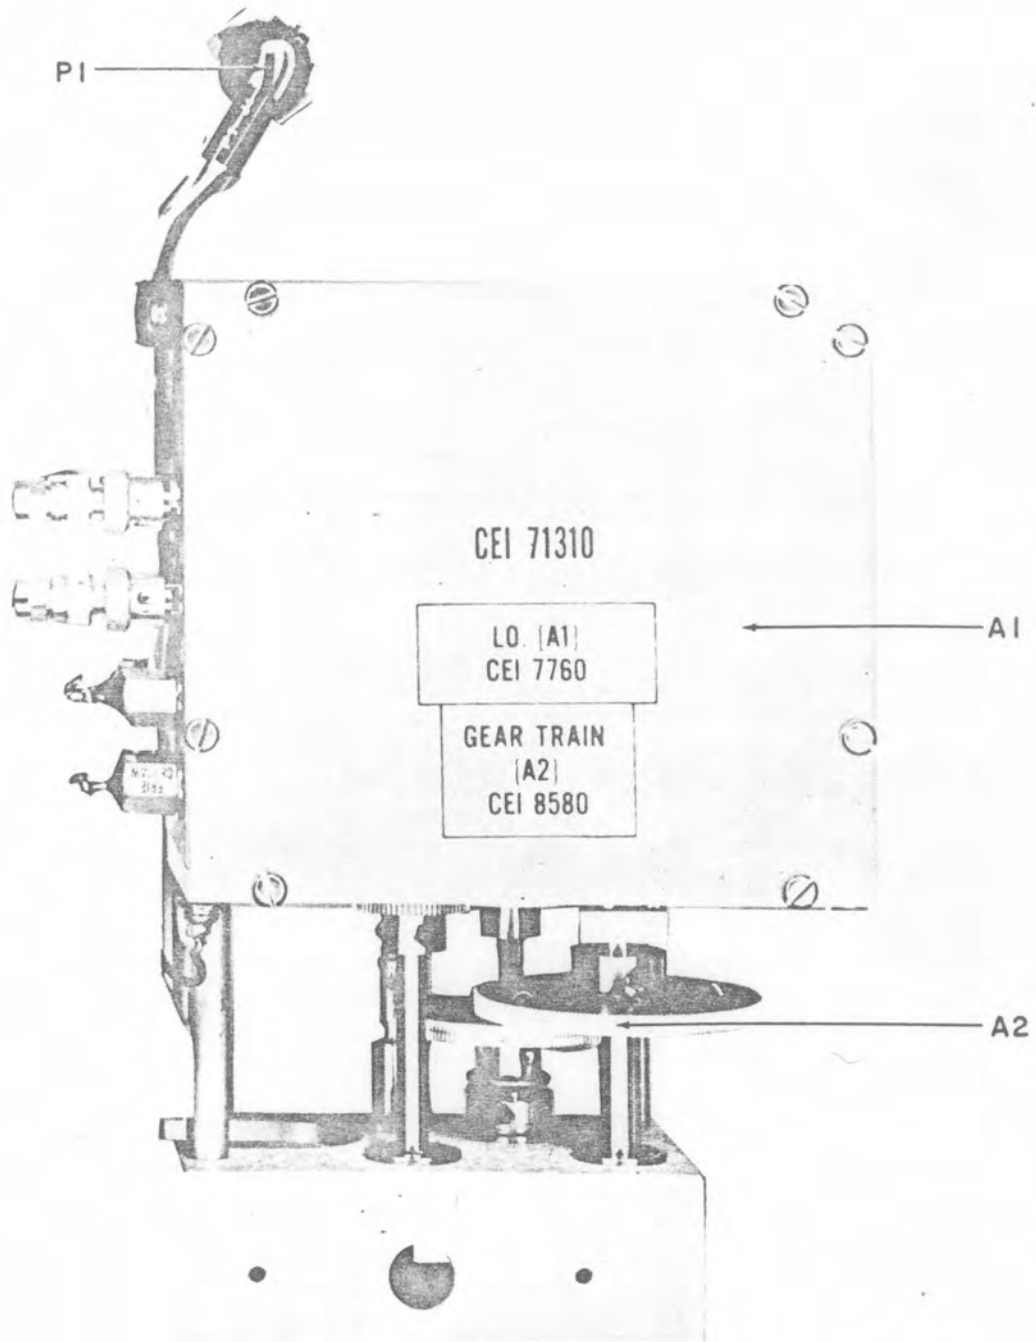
Type 71310 Tuning Assembly (A7), Component Locations
